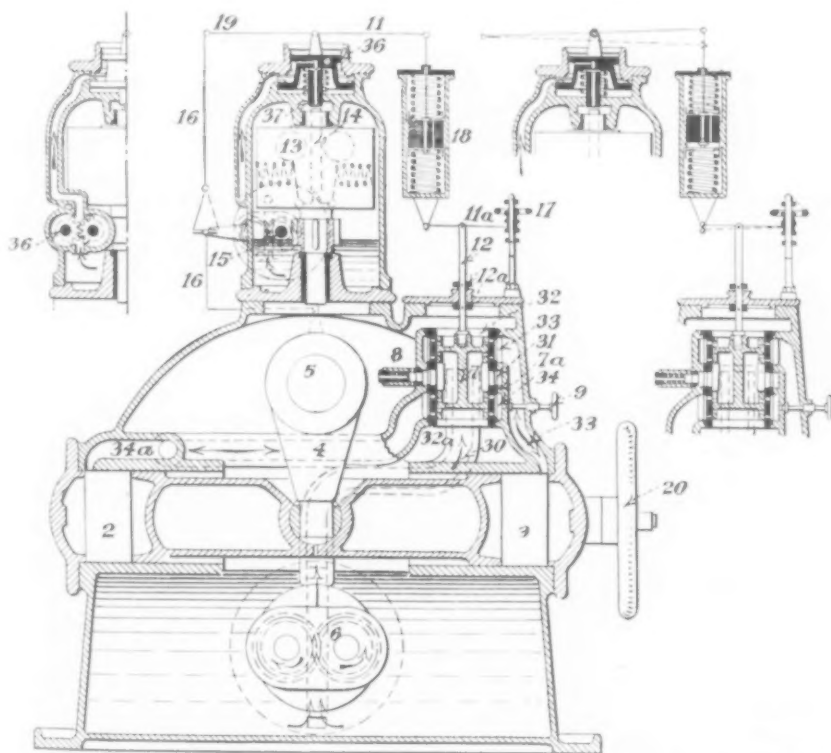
SECTION AND DETAILS OF THE NEW GOVERNOR ON THE KUBEL HYDRAULIC TURBINE.
